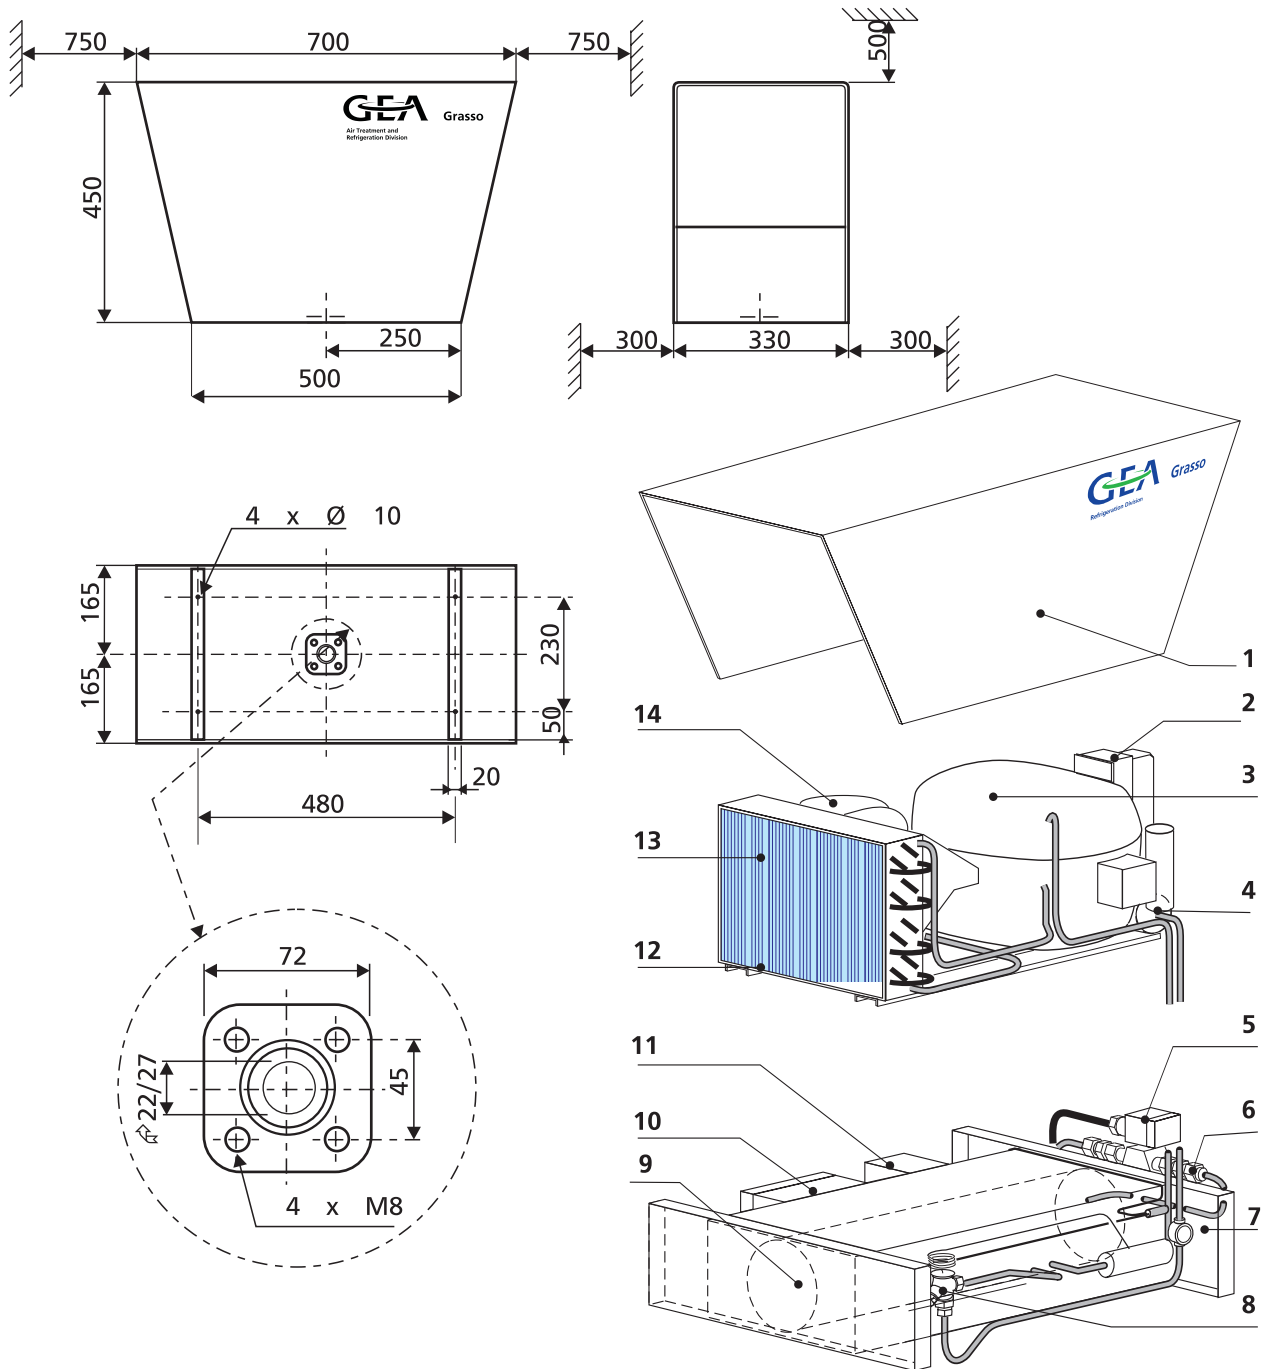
Exploded view and dimensioned sketch (refer Table 4.2-1)
